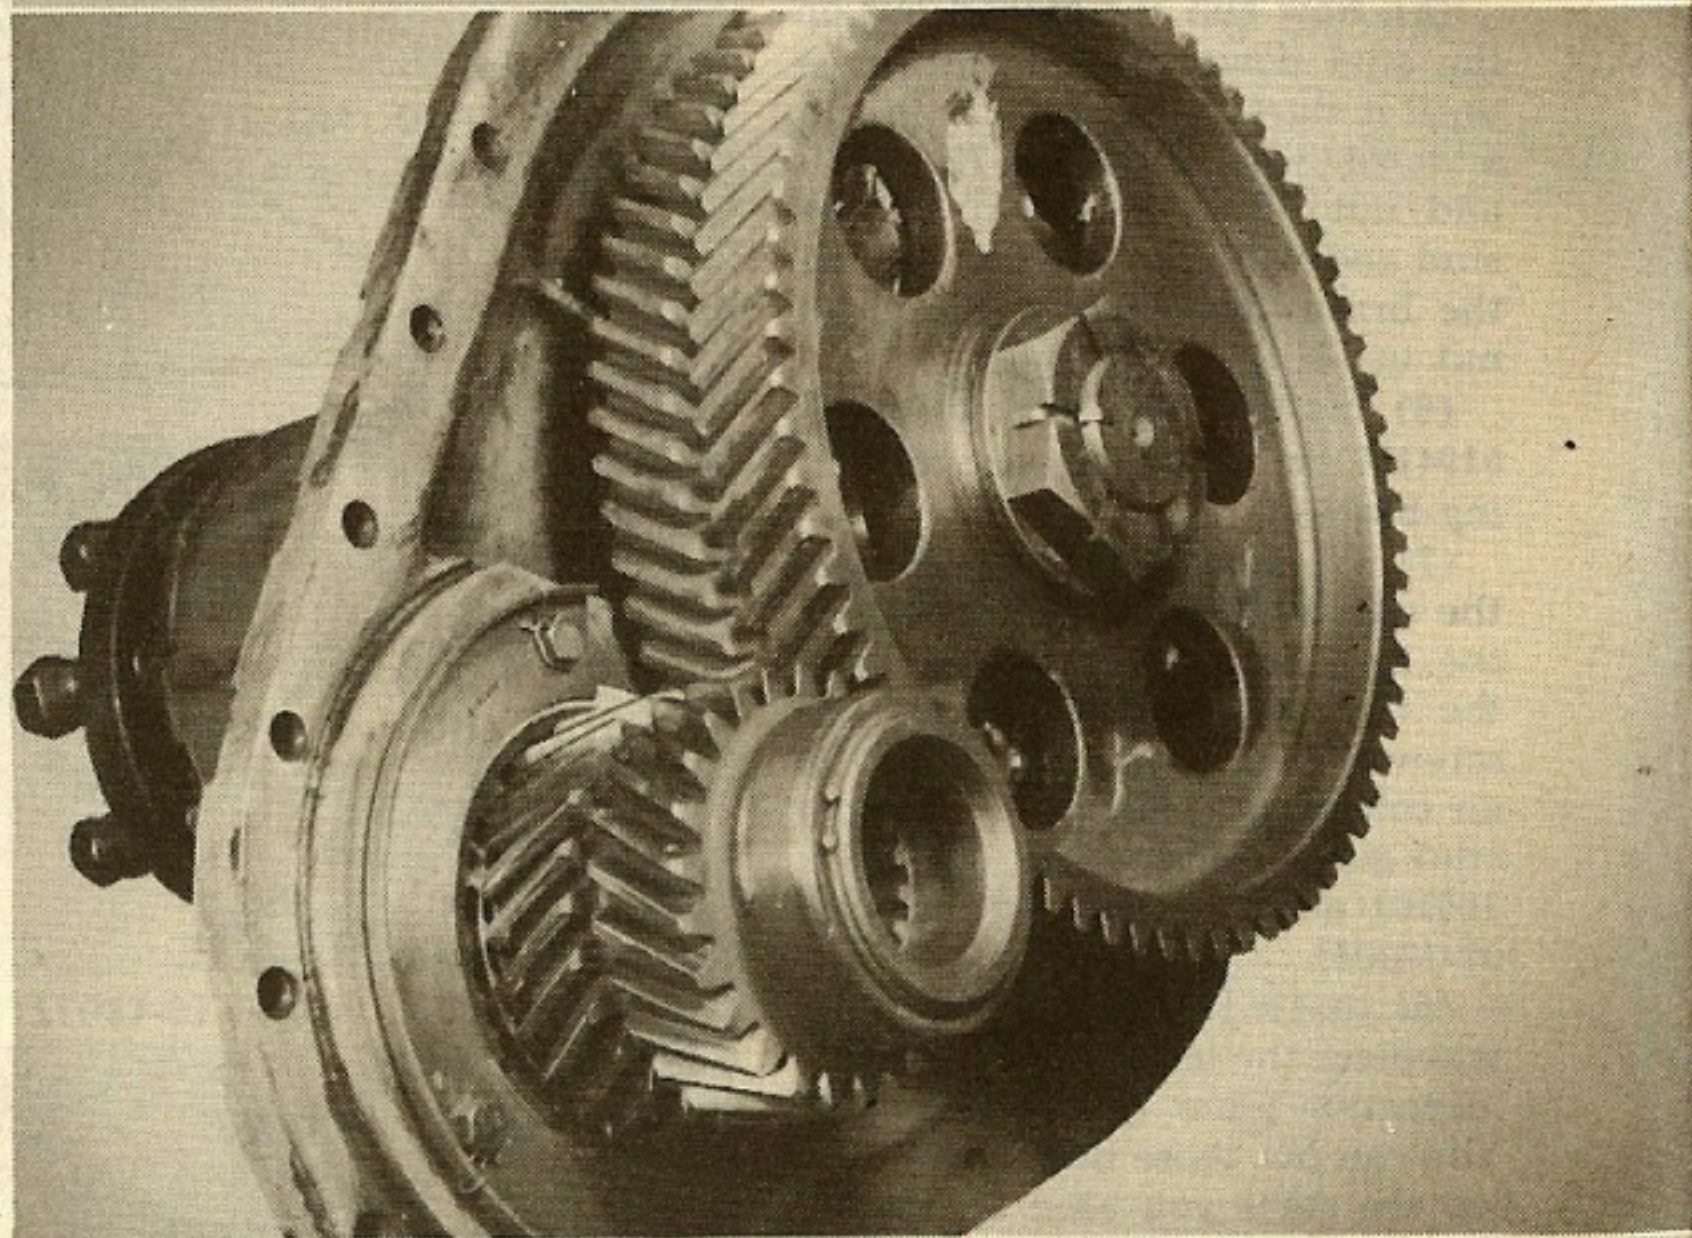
This is the sub-assembly that comes out of done-in final-drive assemblies before you send them to the rear
